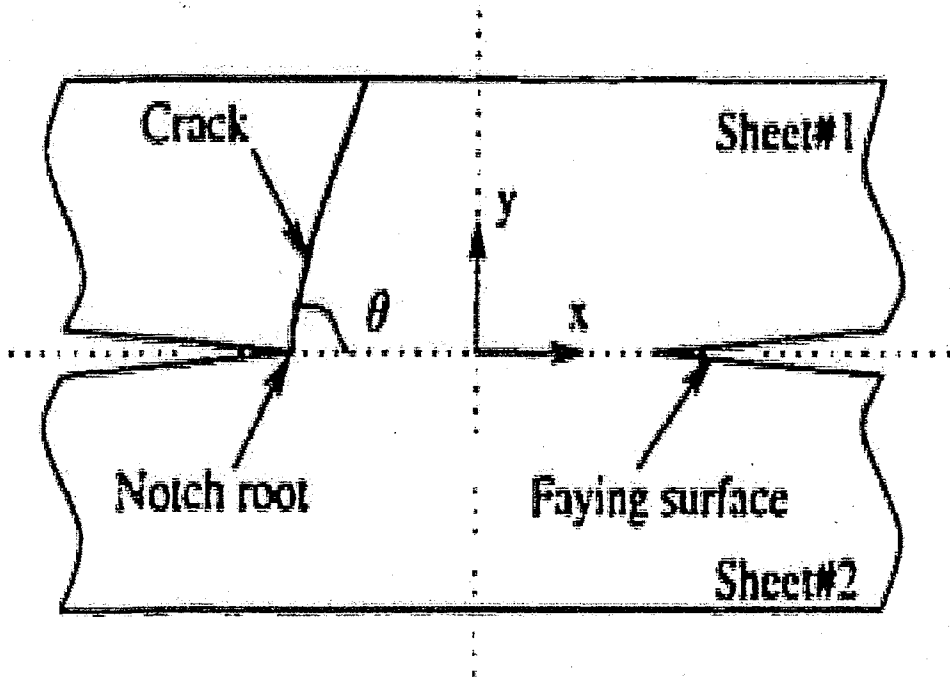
Typical fatigue failure mode of spot welds [3]
